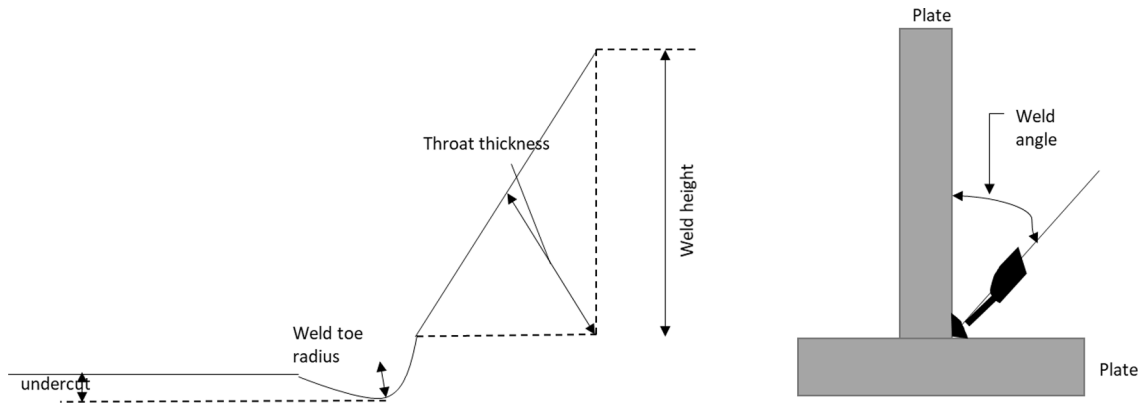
Geometrical investigated parameters in laser weld scanning.
